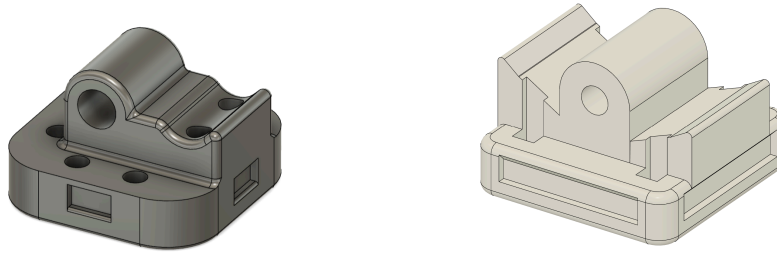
Shoulder hinge connection pieces. The initial is shown on the left and the final is shown on the right.
